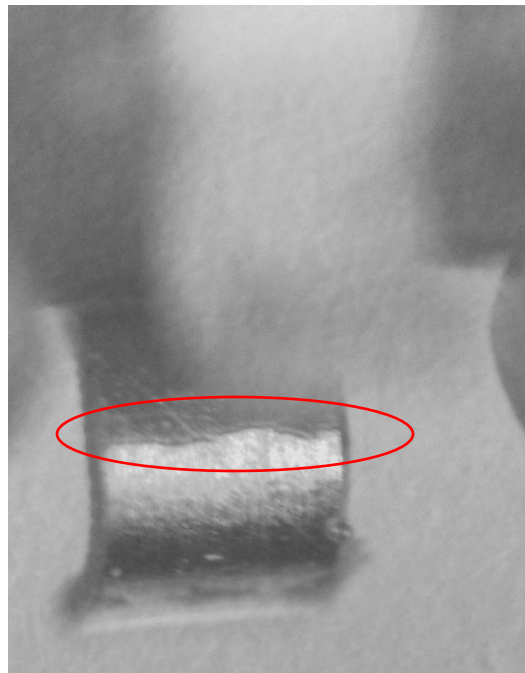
Back View of Crack (Circled) Initiating in the Gold Layer of a Spring after 18 Million Cycles at 4x Magnification
